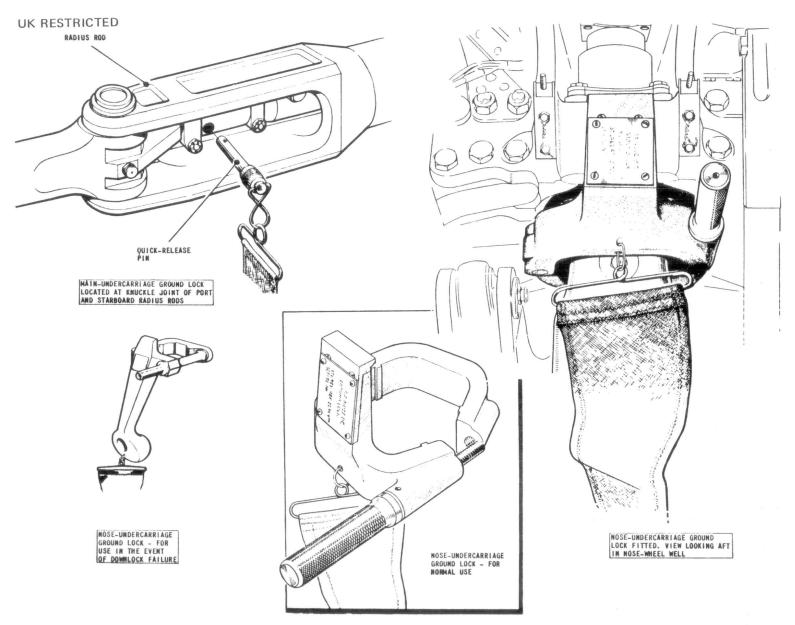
ALIGHTING GEAR SAFETY LOCKS
